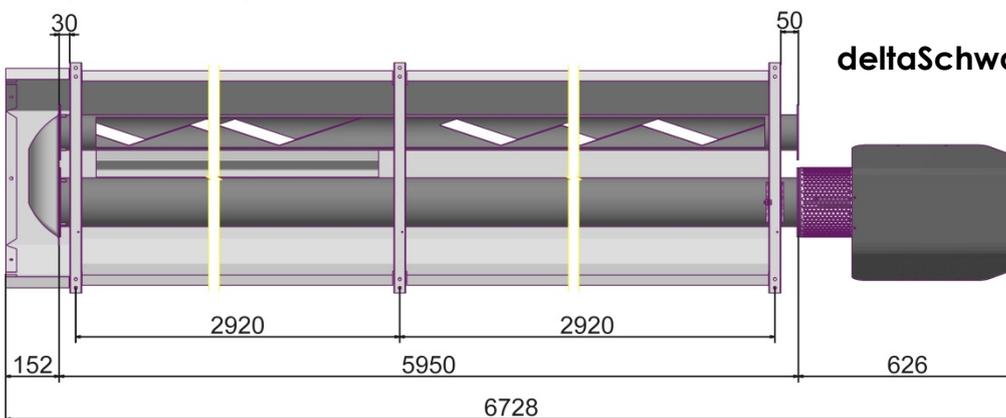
Dimension deltaSchwank 625U / 635U [view from below]
